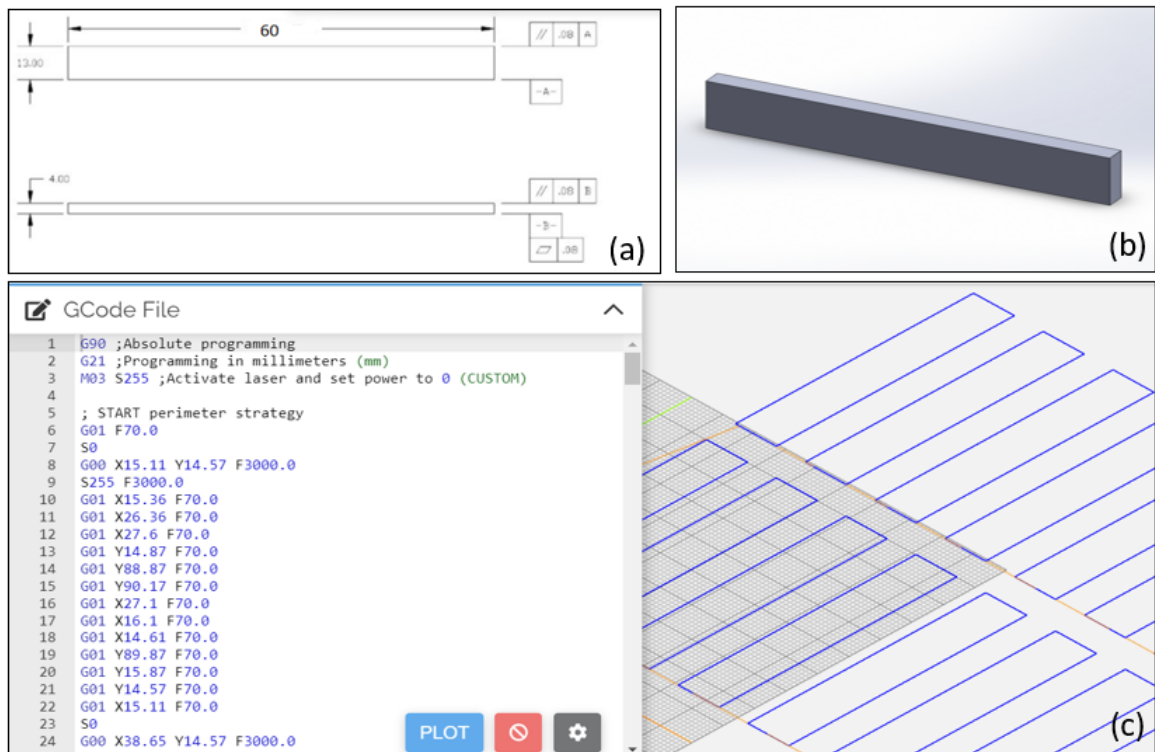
(a) ASTM D7264/D7264M-07 flexural test dimensions, (b) SolidWorks design, and (c) G-code for LOM print.
